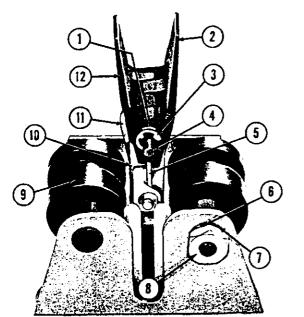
BRACKET AND ROLLER ASSEMBLY, LIFT ARM
